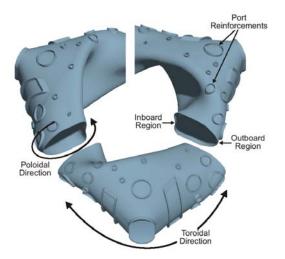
NCSX vacuum vessel sub-assemblies (partially fabricated)
